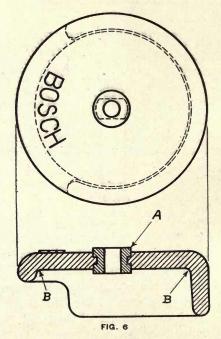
shows a molded piece with a metallic insert "A" molded in. Such pieces can be easily produced in
